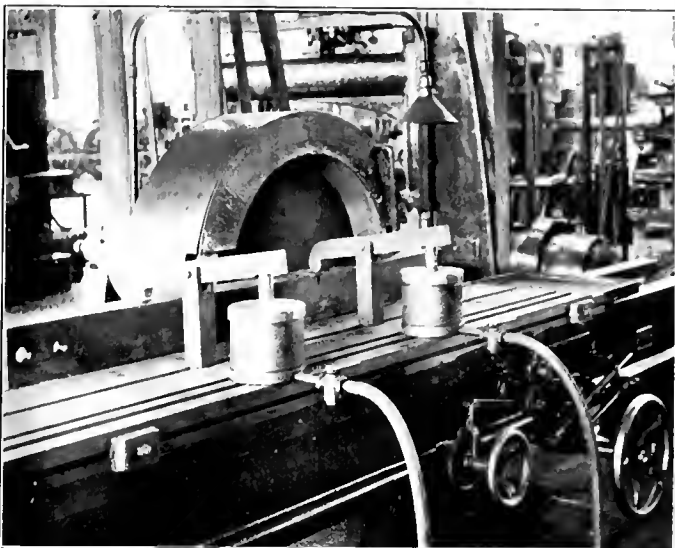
Air Cylinders Used for Clamping Guide Bars to Grinding Machine.
